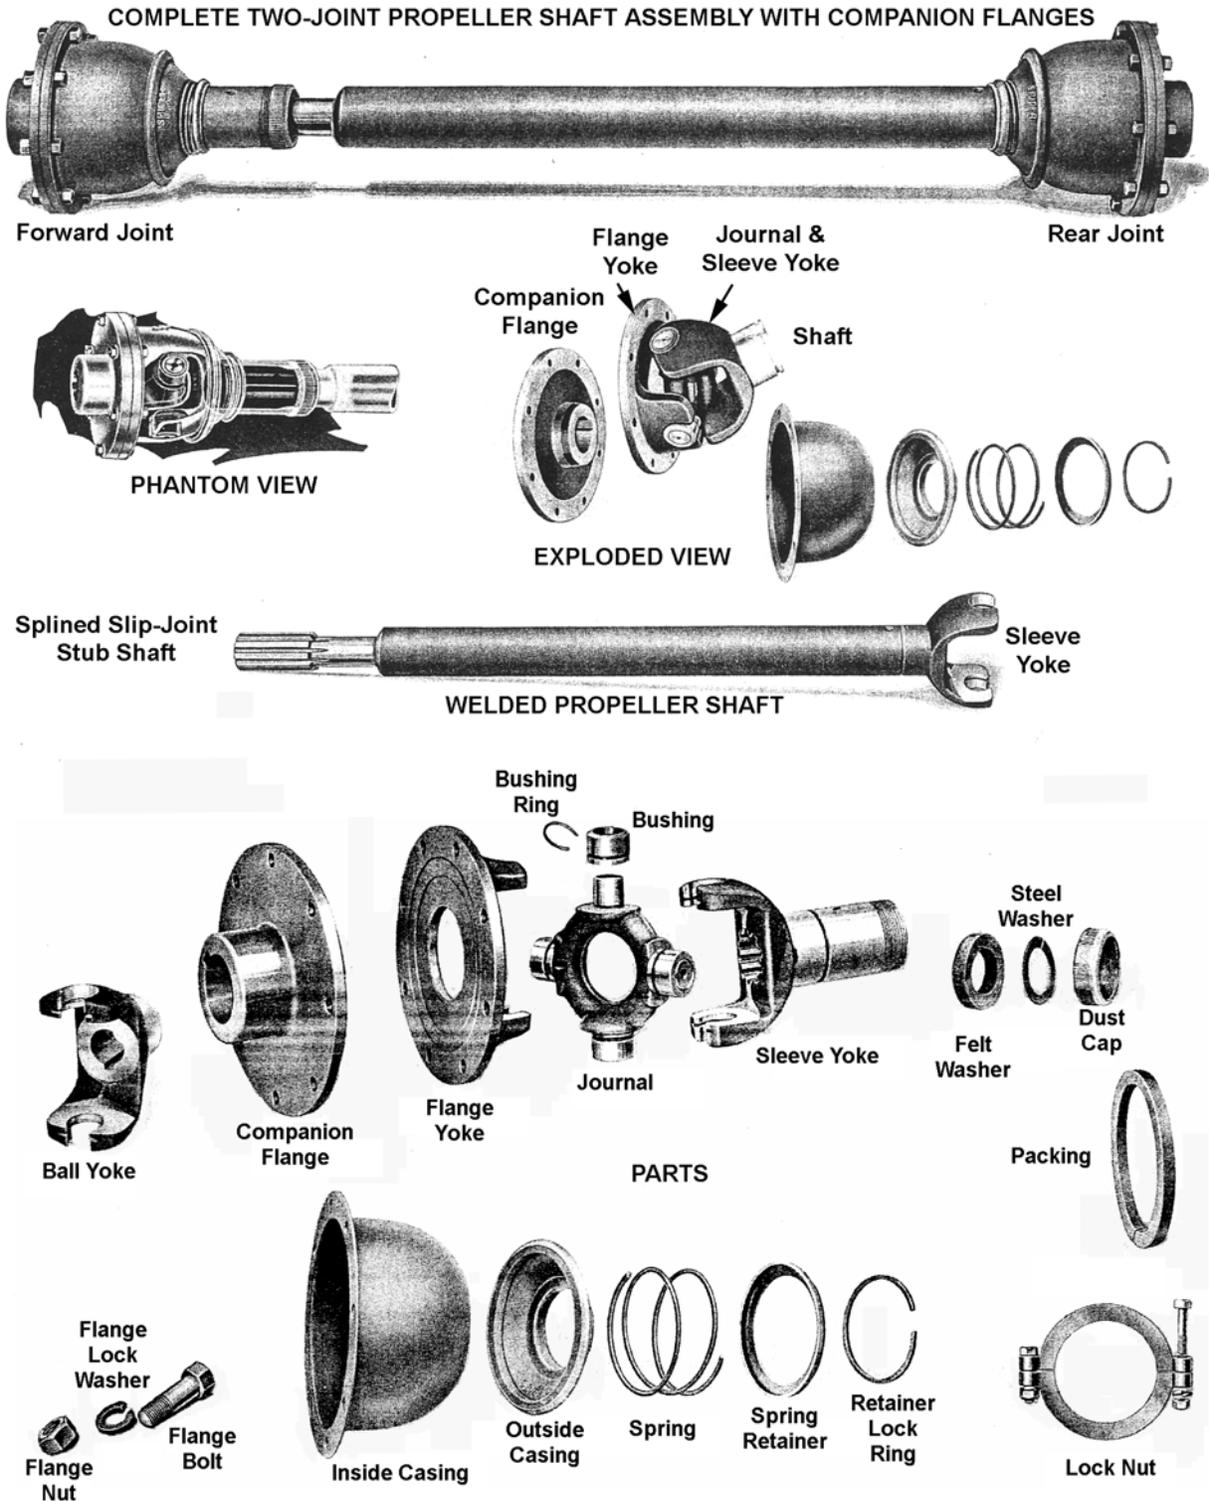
SPICER UNIVERSAL JOINT & PROPELLER SHAFT DETAILS
